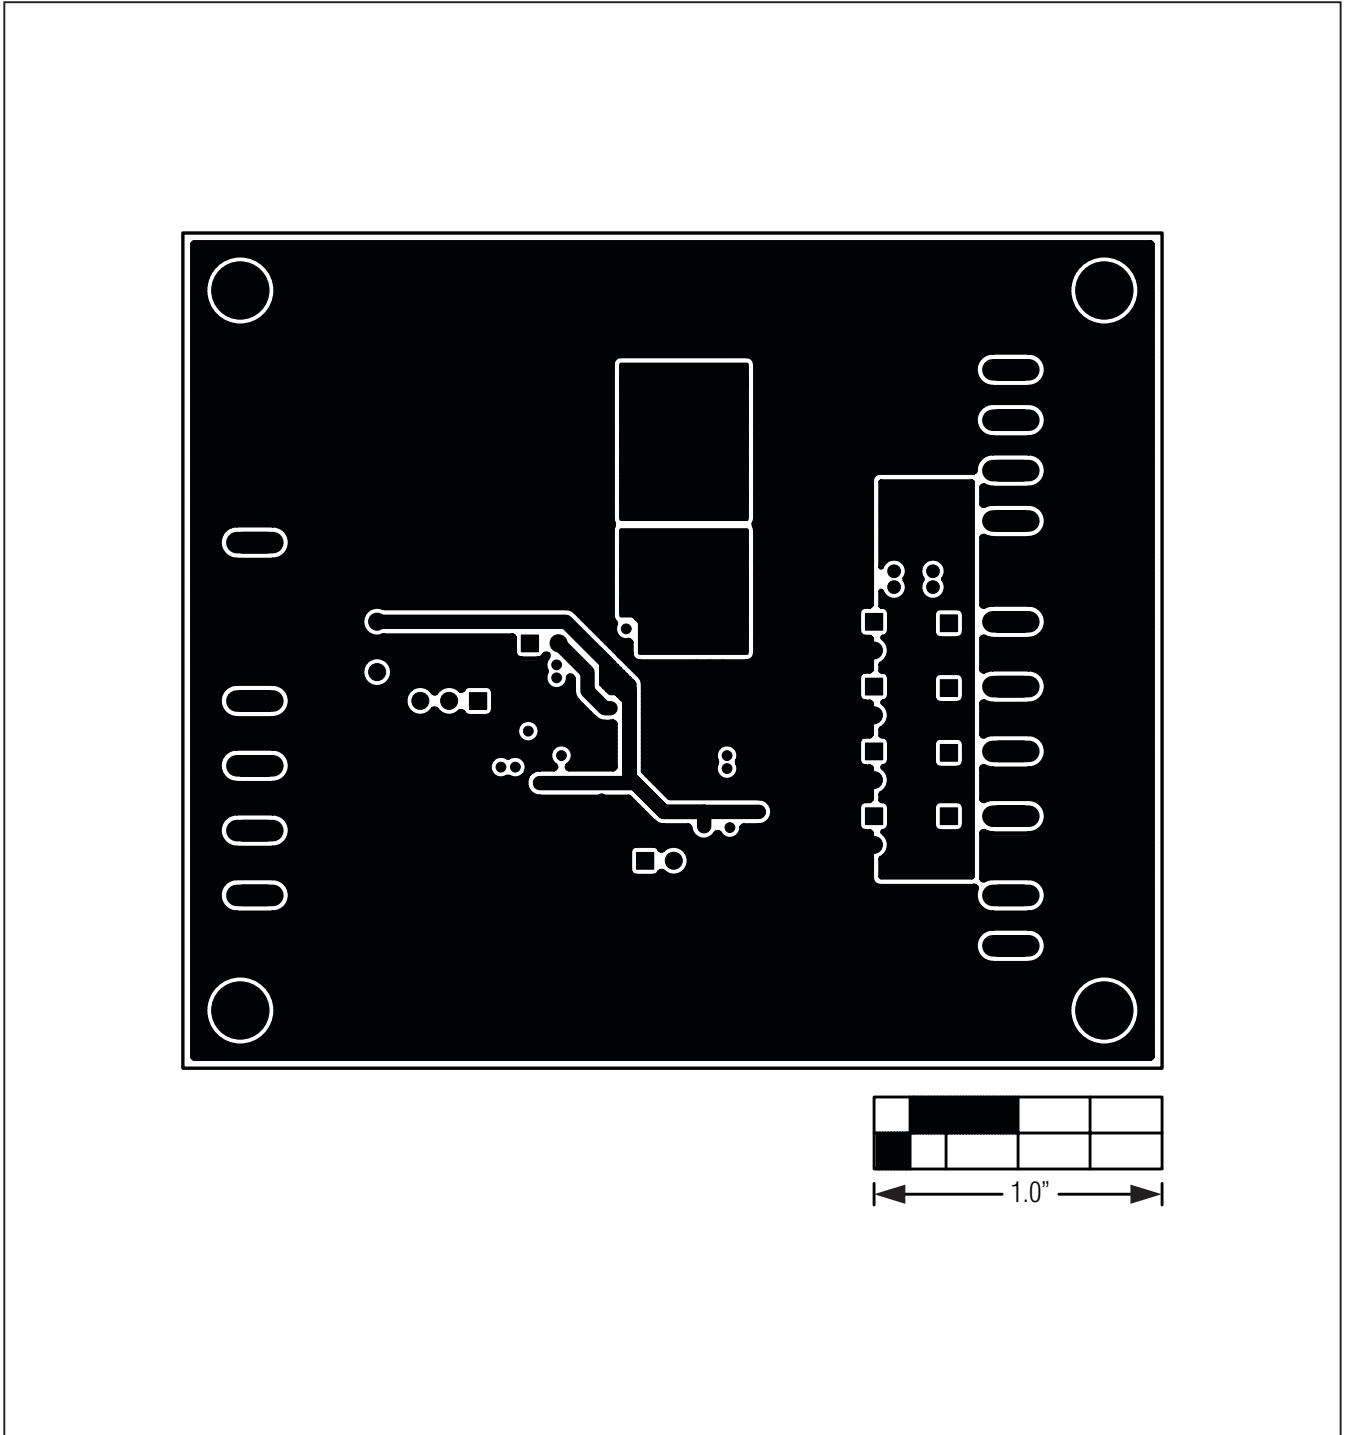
MAX16814 EV Kit PCB Layout—VCC and PGND Solder Side
